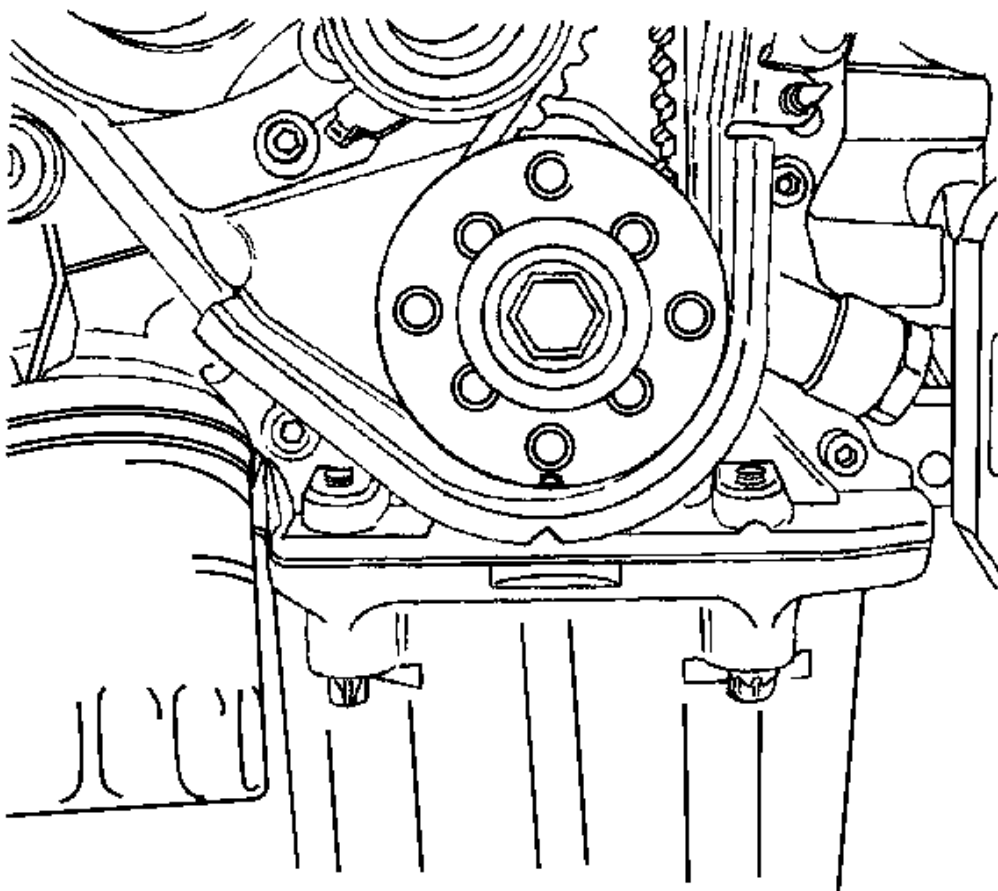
View Of Crankshaft Gear Bolt And Timing Notch
